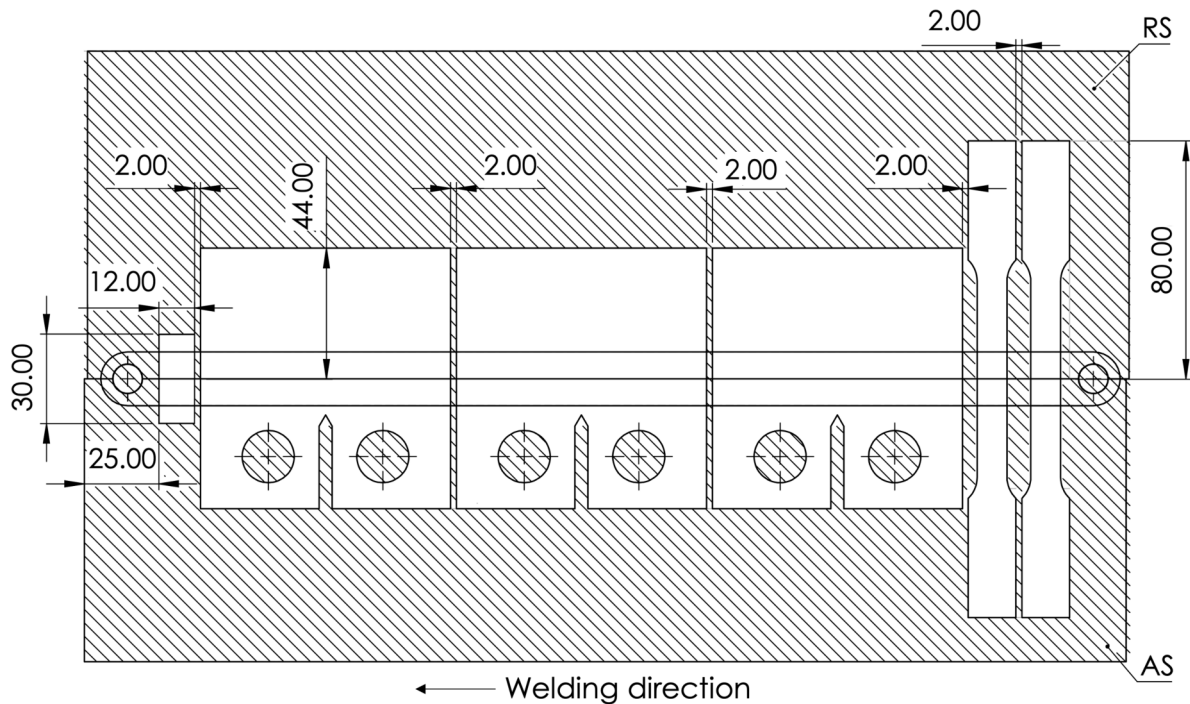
Arrangement of AA5083-H111 FSWed sheets used for fatigue, tensile and metallographic specimen manufacture. All dimensions are indicated in mm
